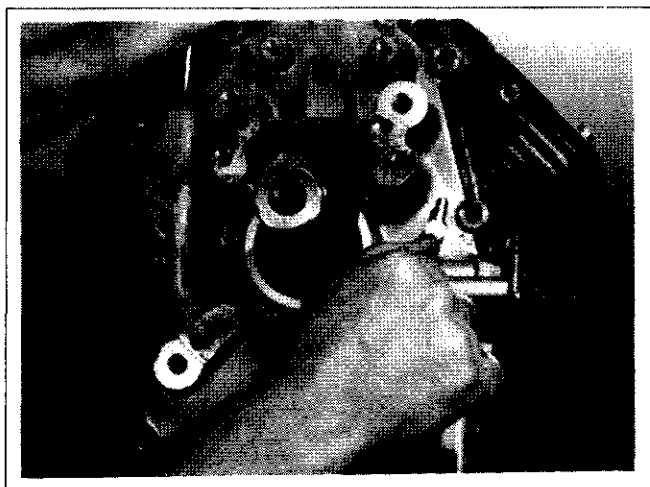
Using Spanner Wrench to Turn Crankshaft.
